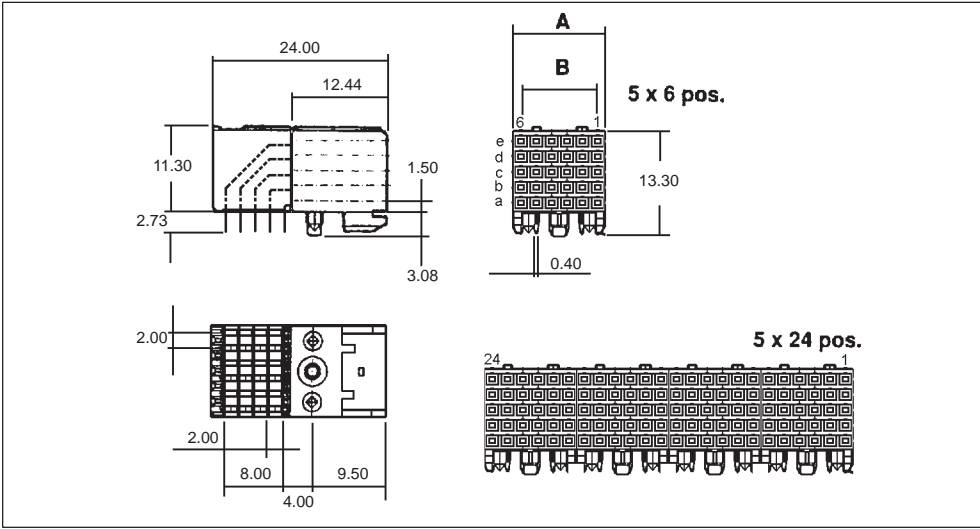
Dimensional drawing of an iPCI bus socket strip
